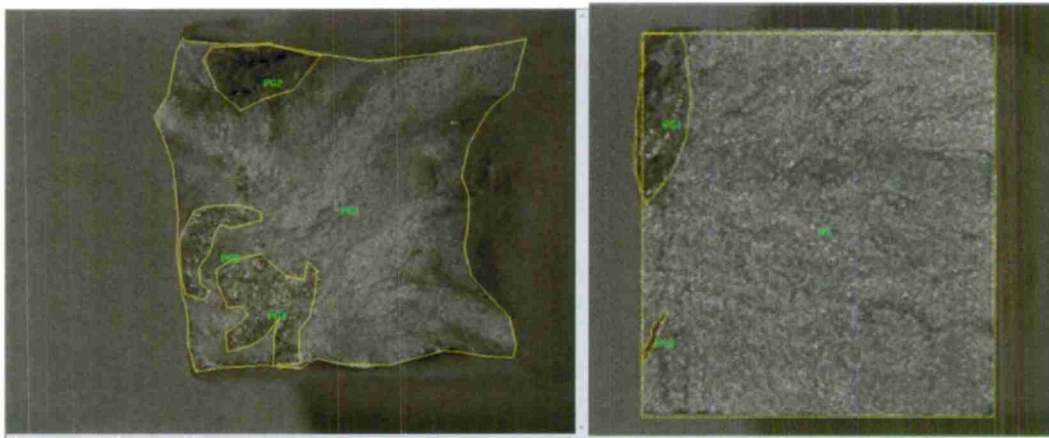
Examples of fracture surface indication measurements taken from a CF8 and 165/135 cast steel tensile specimens.
